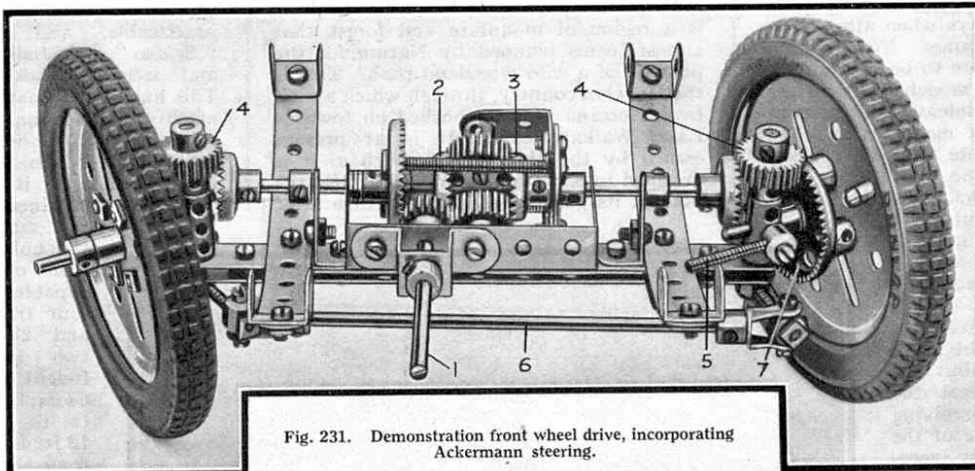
Demonstration front wheel drive, incorporating Ackermann steering.
